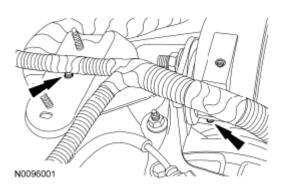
Locating Negative Battery Cable Pin-Type Retainers Courtesy of FORD MOTOR CO.
